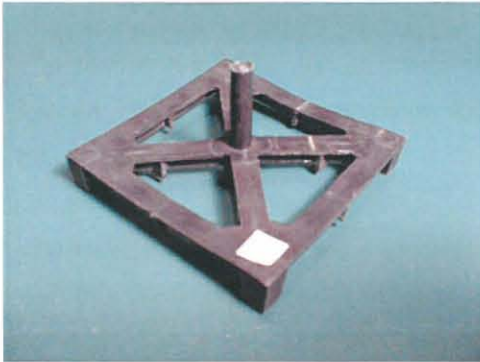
User Part Showing Warping and Cold Weld Lines
